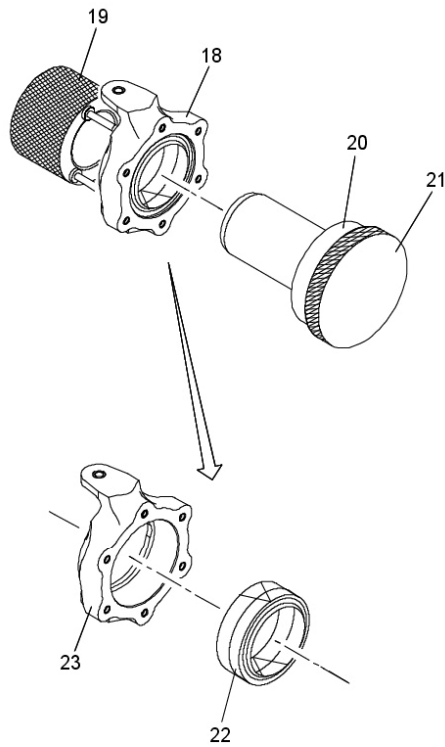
(sheet 2 of 4). Housing and slider group - Disassemble procedure (Sleeve assy P/N 109G6430A03)
